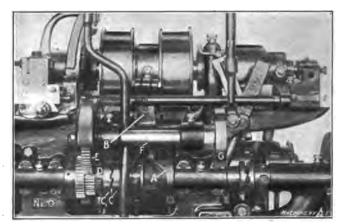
Bear View of No. 0 Brown & Sharpe Automatic Screw Machine showing Reversing Mechanism and Belt Shifting Attachment
